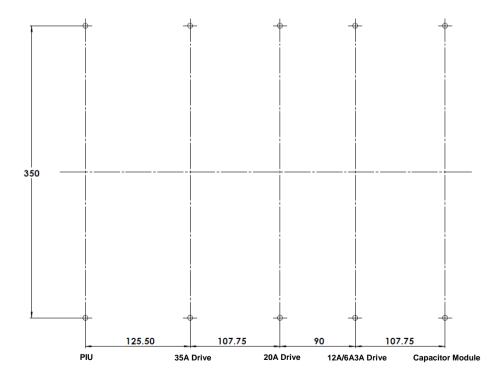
PIU, 35A, 20A and 12A/6A/3A drives heatsink cut-outs and Capacitor Module mounting hole positions in an array Duct mount
